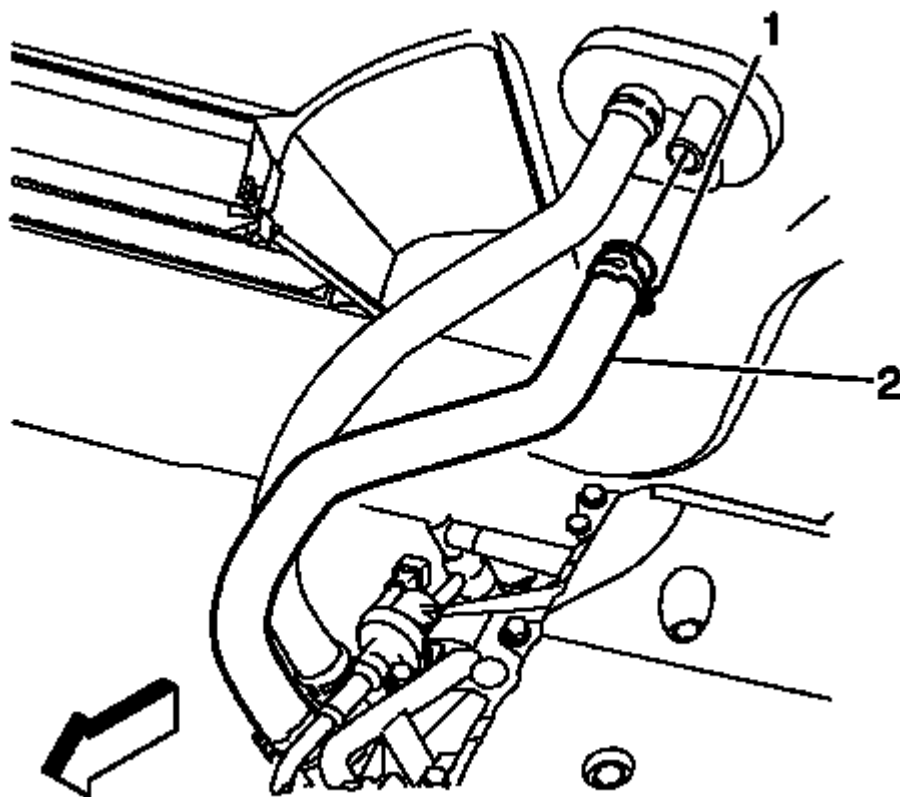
Heater Inlet Hose & Clamp At Heater Core
